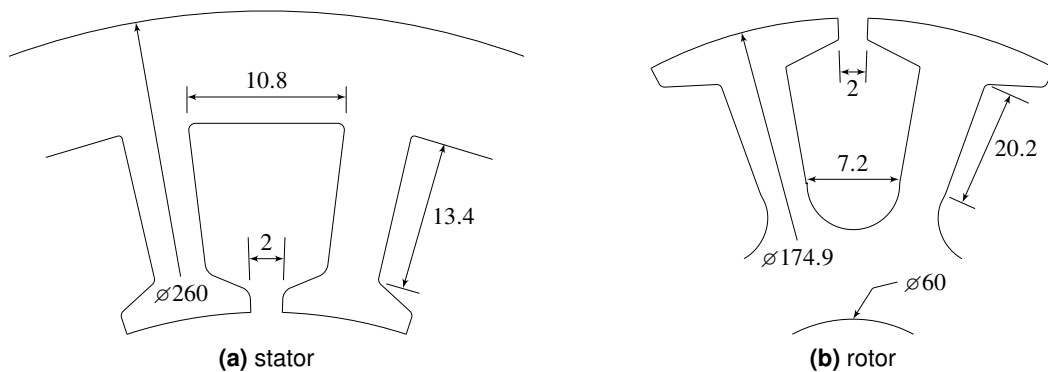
Grid-connected WRSM and WRIM application example cut-off lamination cross-section and dimensions, (mm).
